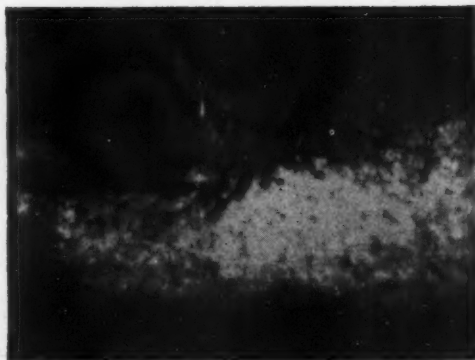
The deformation seen here in front of and below the tool point occurred during the machining of hot-rolled steel at 92 ft. per min.
